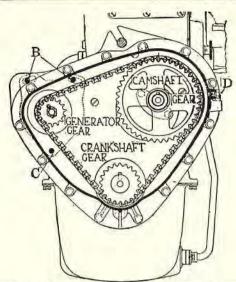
Hupmobile front end drive system. Adjustment of slack in chain is taken up by loosening bolts (B) and (C) and sliding the generator to one side, at the top (B).
